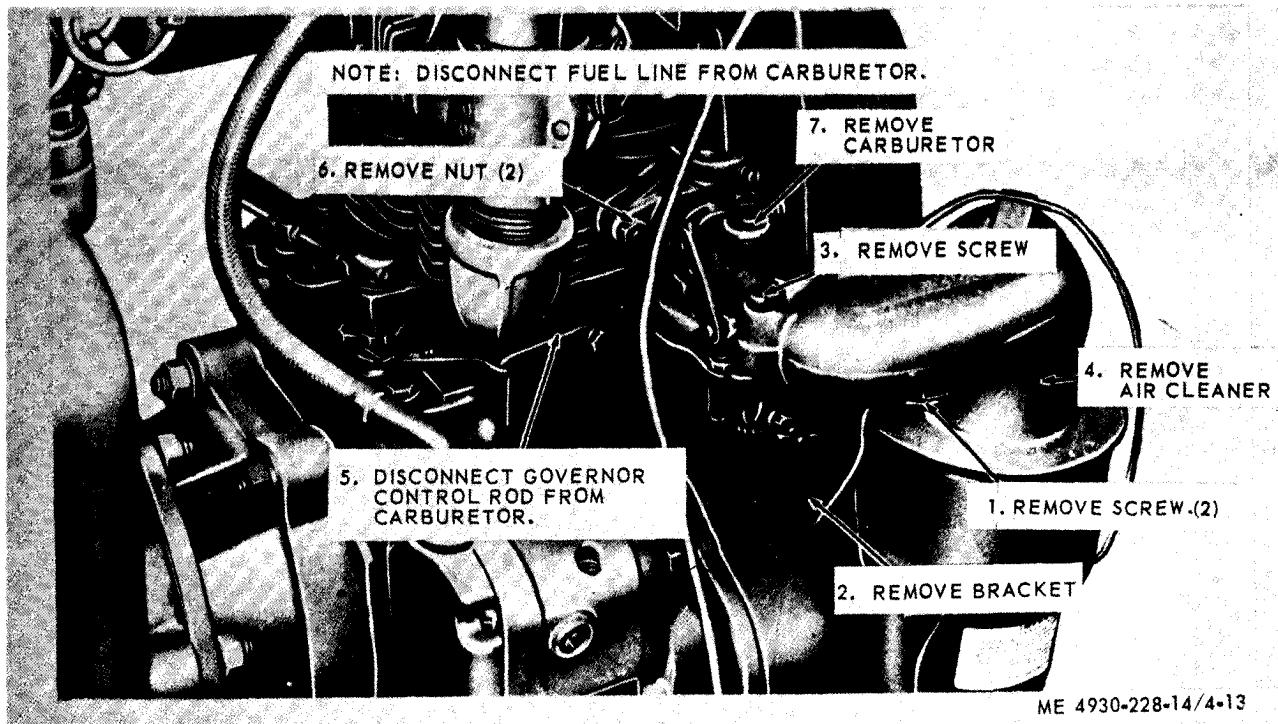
Air cleaner, bracket, and carburetor, removal.
